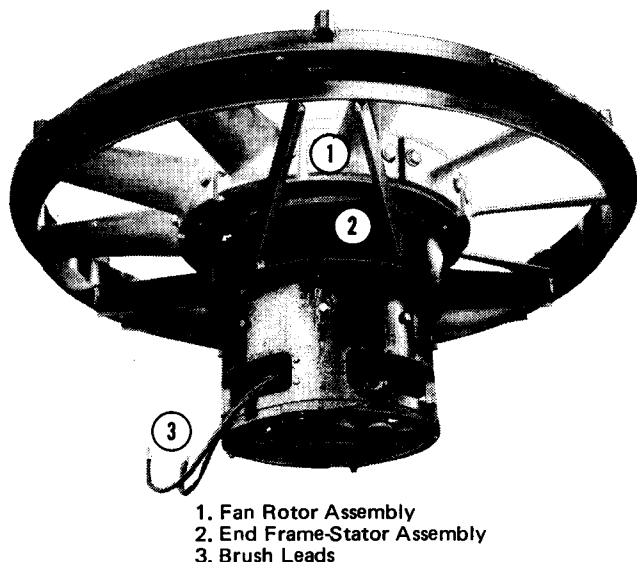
Current Grid Fan And Motor Assembly - 1.22 m (48'') Fan
